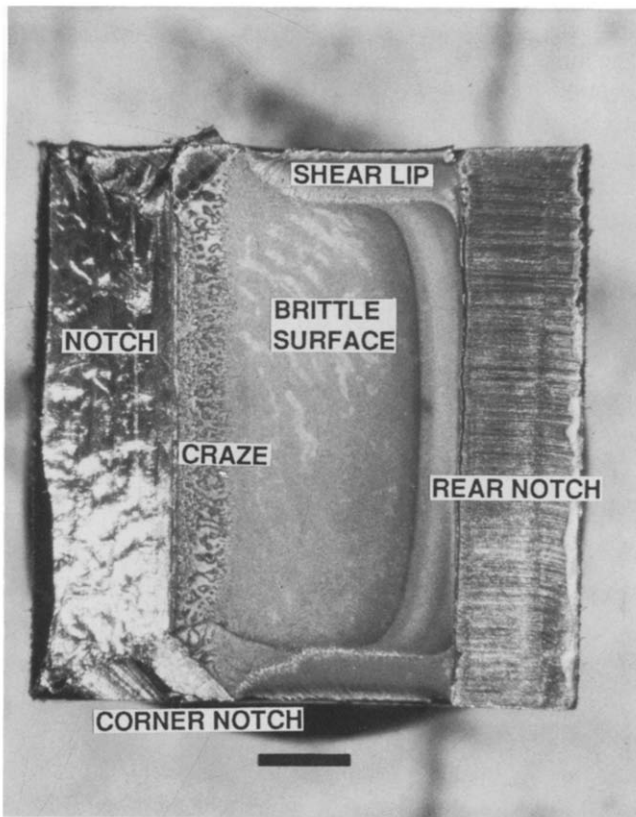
Fracture surface of a rear notched, side-grooved and corner notched specimen. Scale bar = 2 mm
